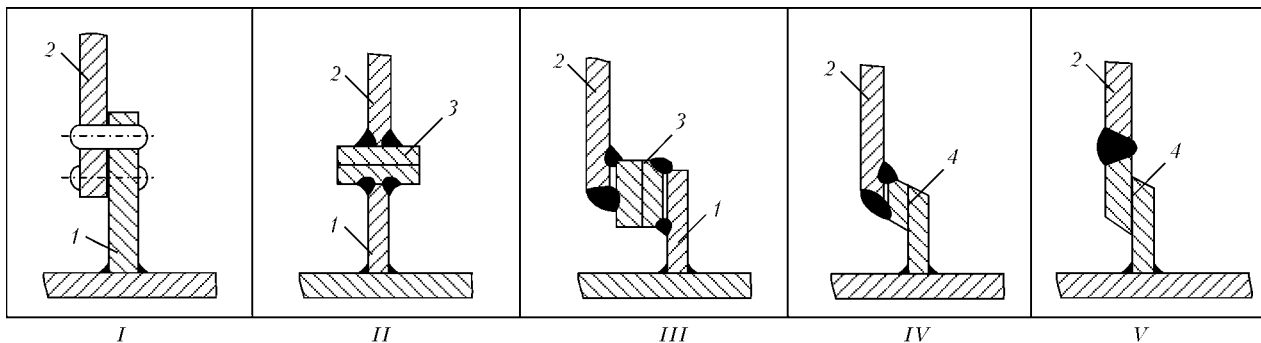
Variants of typical assemblies of joining of aluminium superstructures with steel ship hull: I — riveted assemblies; II–V — welded assemblies with application of bimetal (II — T-; III, IV — overlapped; V — butt); 1 — steel coaming; 2 — aluminium superstructure; 3 — conventional bimetal; 4 — coaming bimetal
